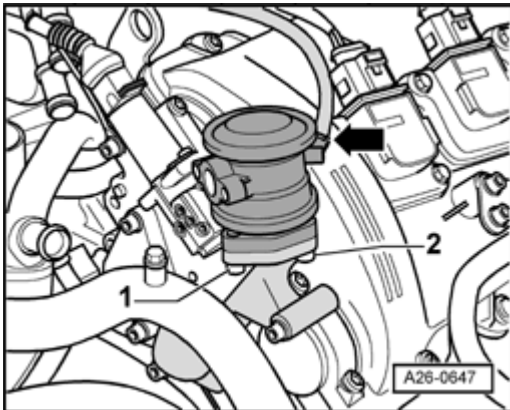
Identifying Vacuum Hose, Bolts & Combination Valve
